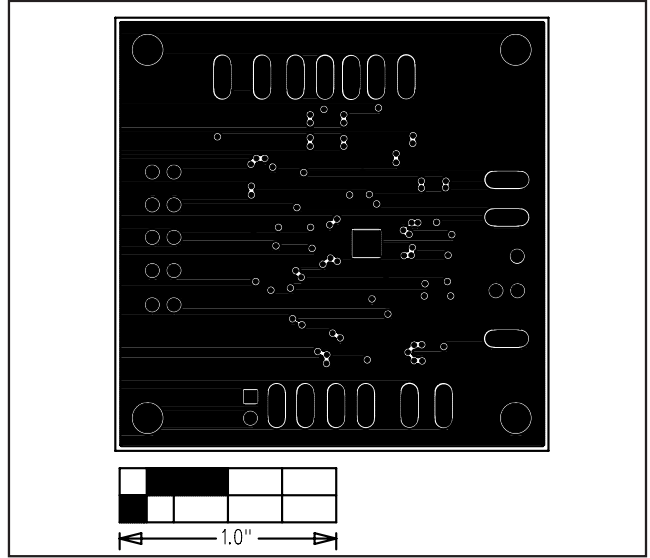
MAX8680 EV Kit PCB Layout—BATT Layer
